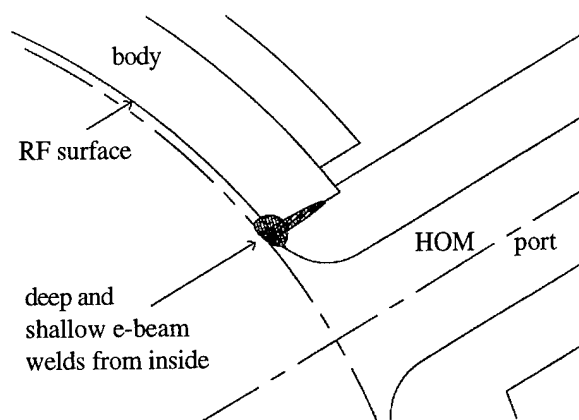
HOM port electron beam welds. Deep weld and shallow re-melt are both made from the inside; the RF surface is cut afterwards.
